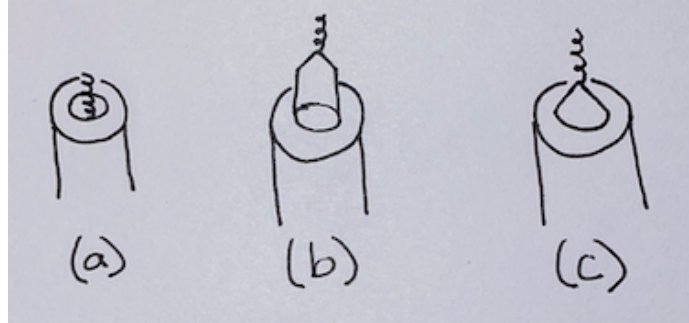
(a) shows the head of the drill being too far down into the chamber, (b) shows the head being too far above the chamber, (c) shows the correct positioning where the cone of the head meets the base of the chamber. Each drill head is roughly 5mm in diameter.
